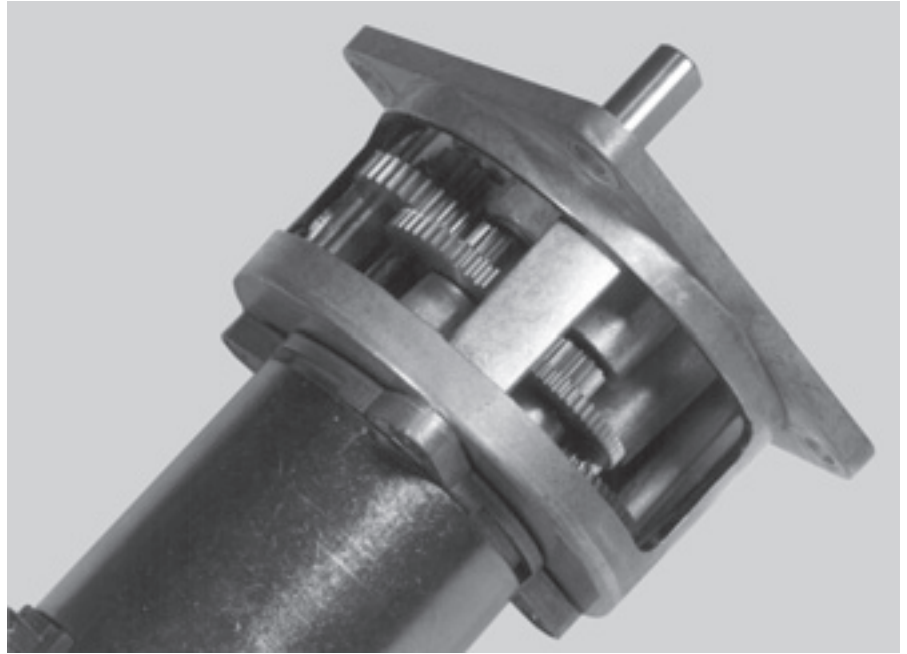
Spur gear stage of a miniature gear motor for universal application (copying machines, vending machines, equipment of all types), manufactured by Bühler Nachfolger GmbH, Nürnberg, Germany
